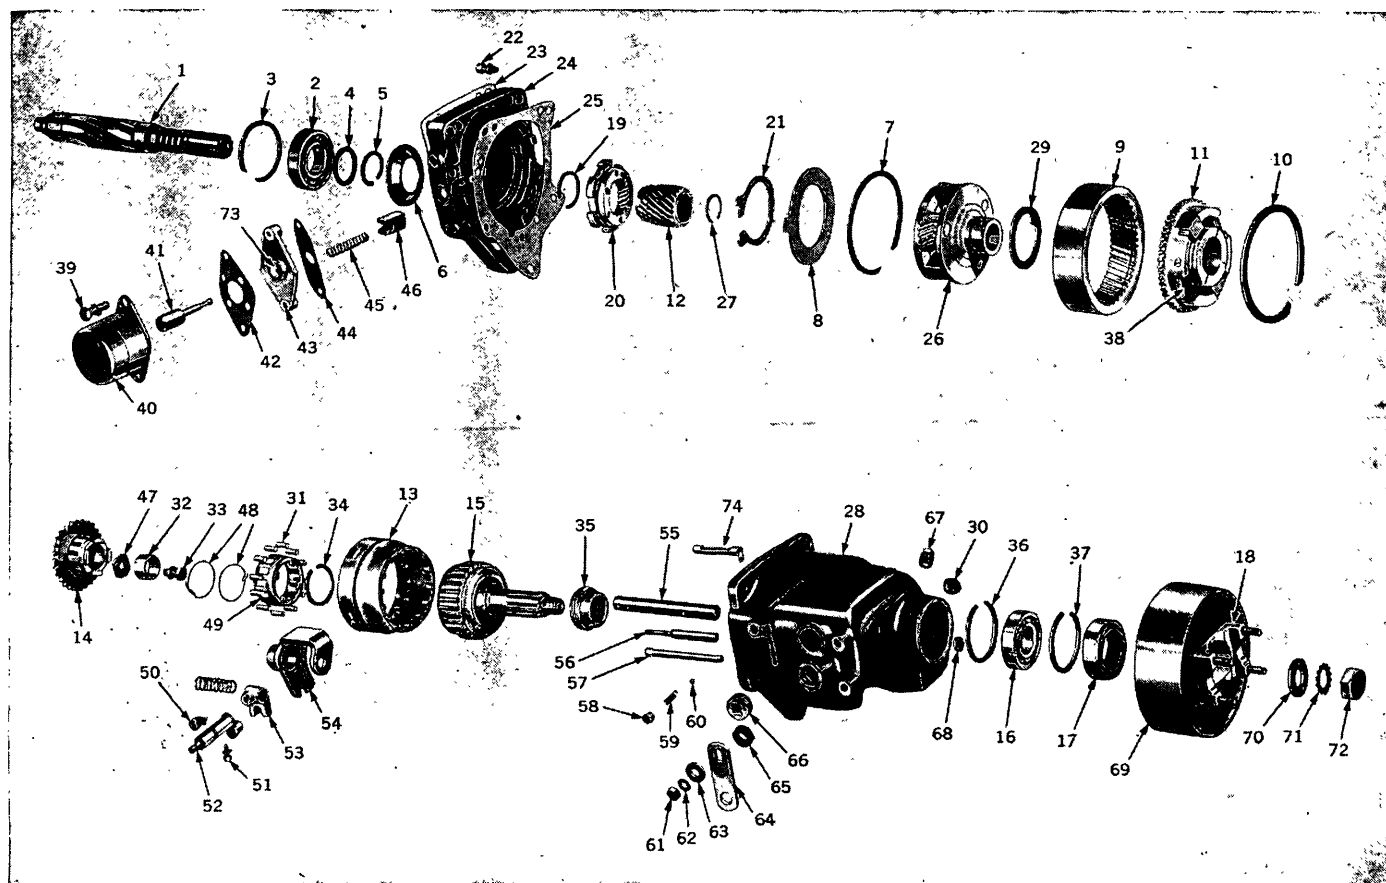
Exploded view of overdrive, Chrysler and De Soto 1939-40. See Fig. 2 for other cars using this type
